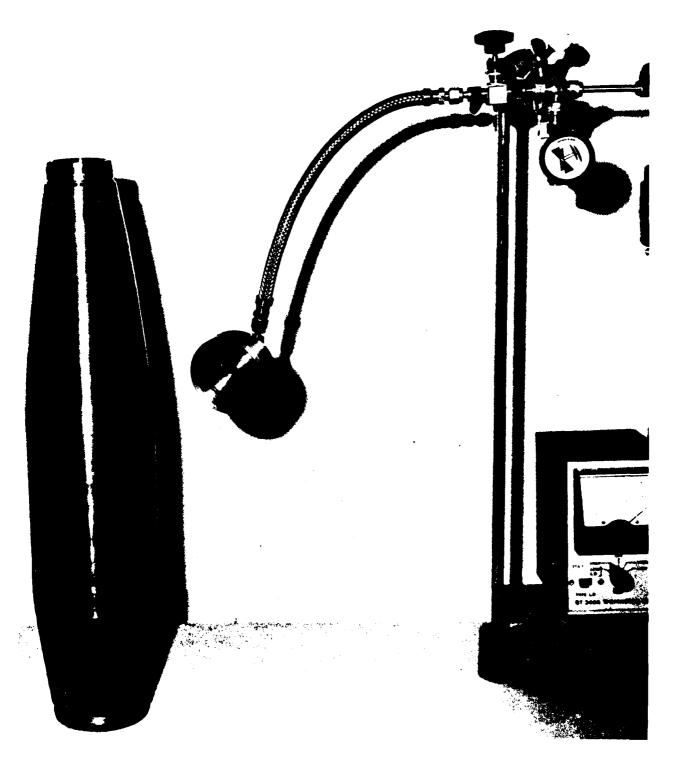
CLOSE-UP VIEW OF TEST FIXTURE AND TWO-PIECE PROJECTILE. THE O-RING THAT SEALS TO THE PROJECTILE NOSE CAN BE SEEN INSIDE THE TEST FIXTURE.
